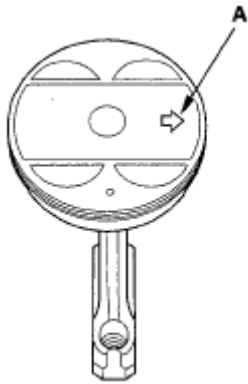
Identifying Piston/Connecting Rod Assembly Mark
